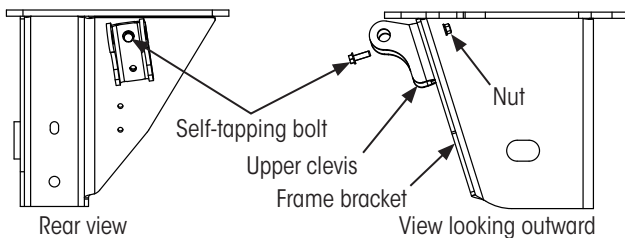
INTRAAX winged frame bracket requiring upper clevis reinforcement bolt
